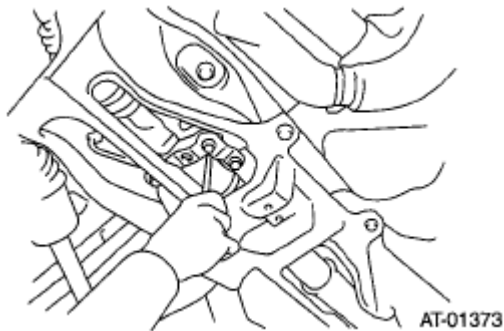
Removing Clutch Housing Cover Securing Bolts (1 Of 2)
